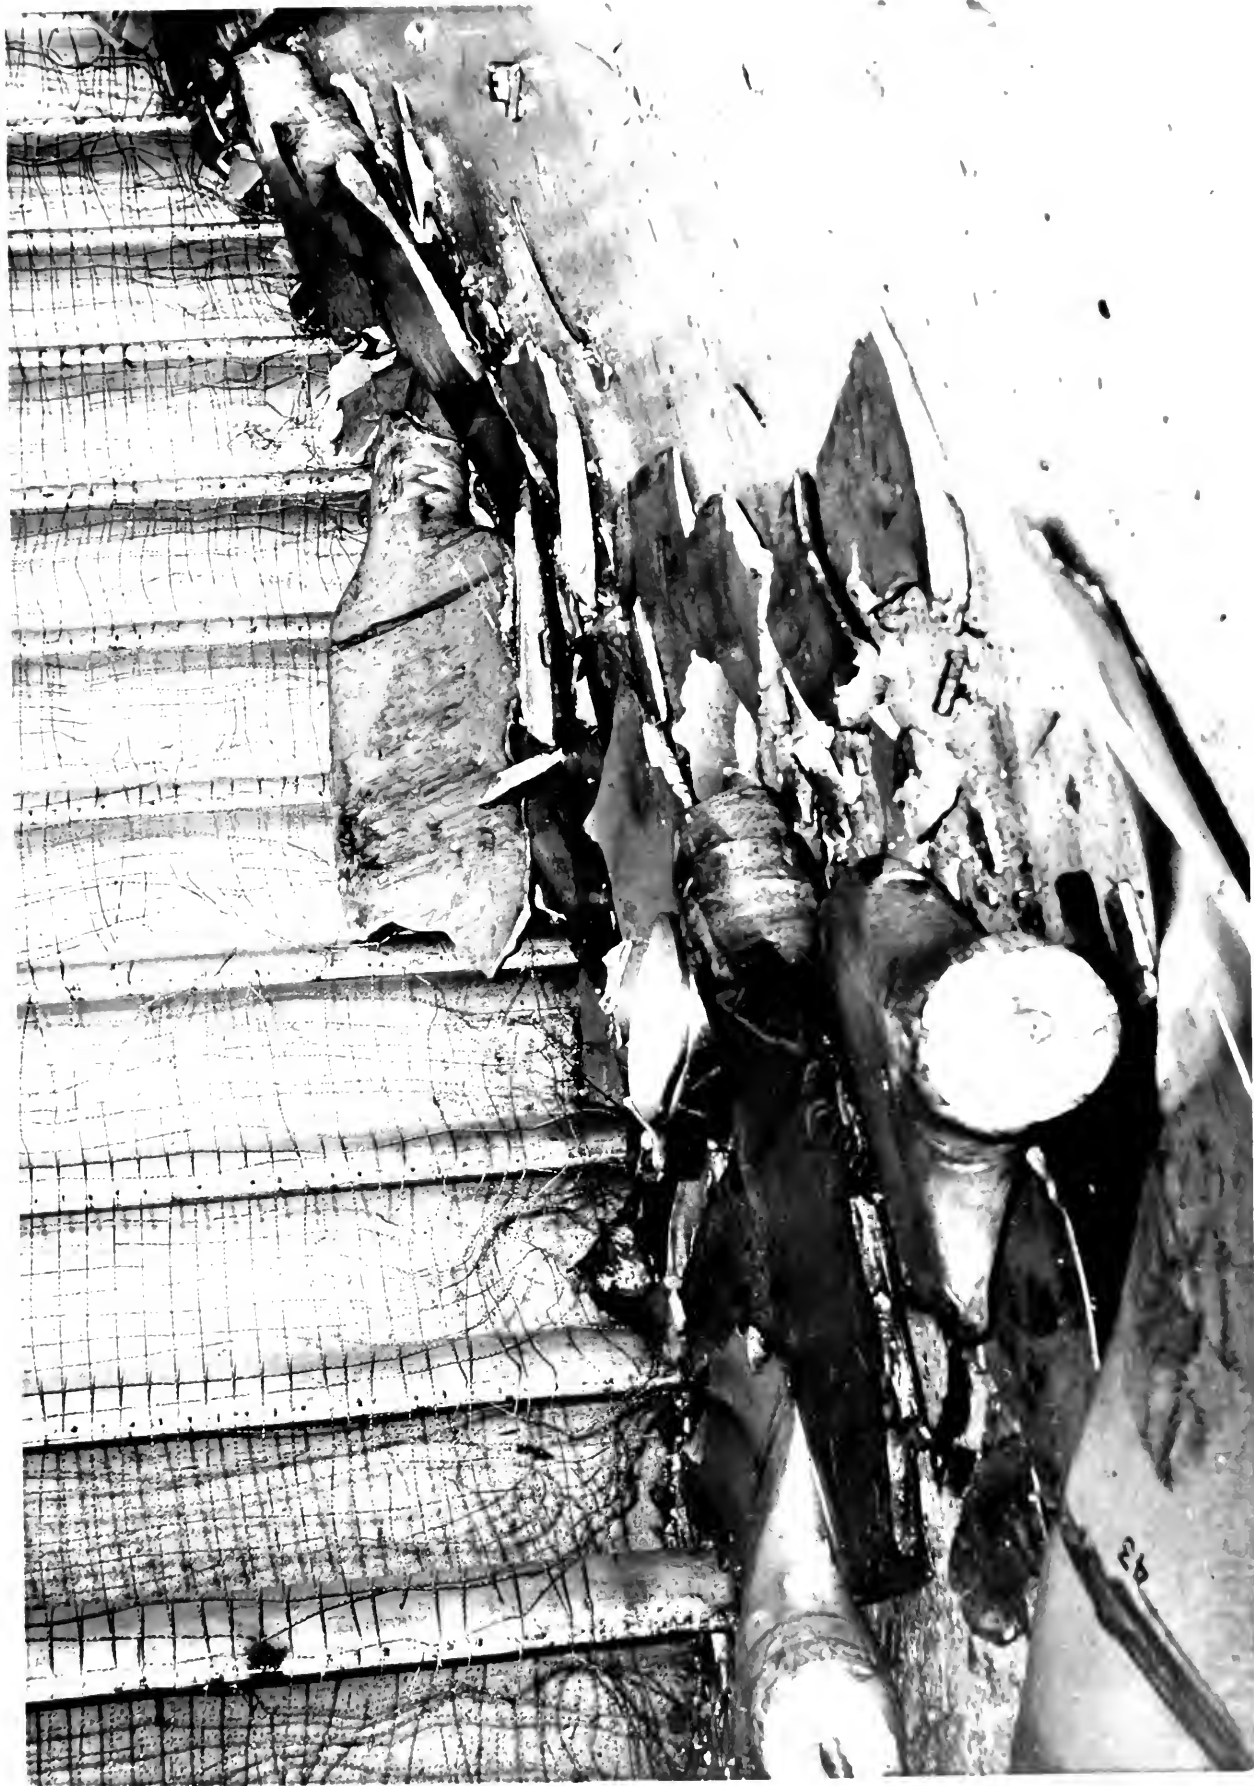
END VIEW - ORIGINAL BLADE FAILURE
